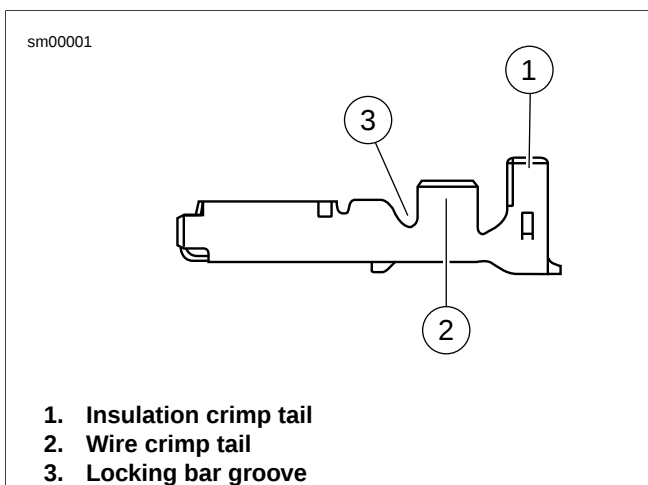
Tyco 070 Multilock Unsealed Connector: Socket Terminal
